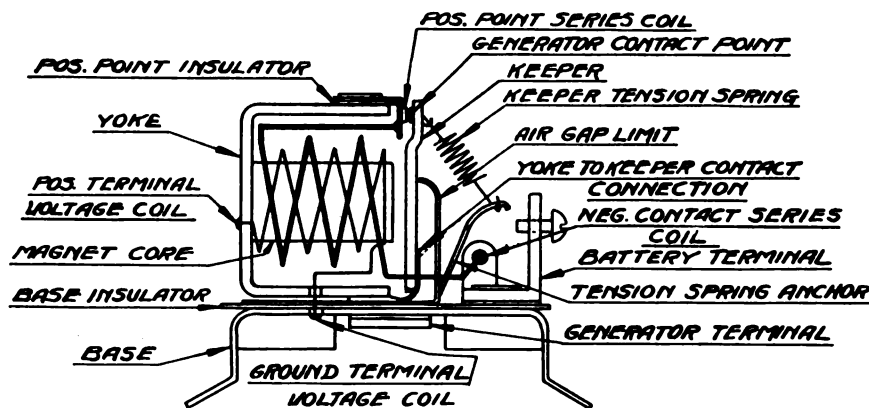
A WIRING DIAGRAM OF THE CUT OUT WITH ALL PARTS CLEARLY INDICATED.
